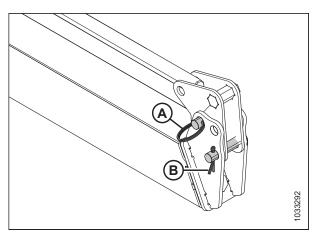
Double Reel, Right Arm – Rear (Canola) Position Shown
